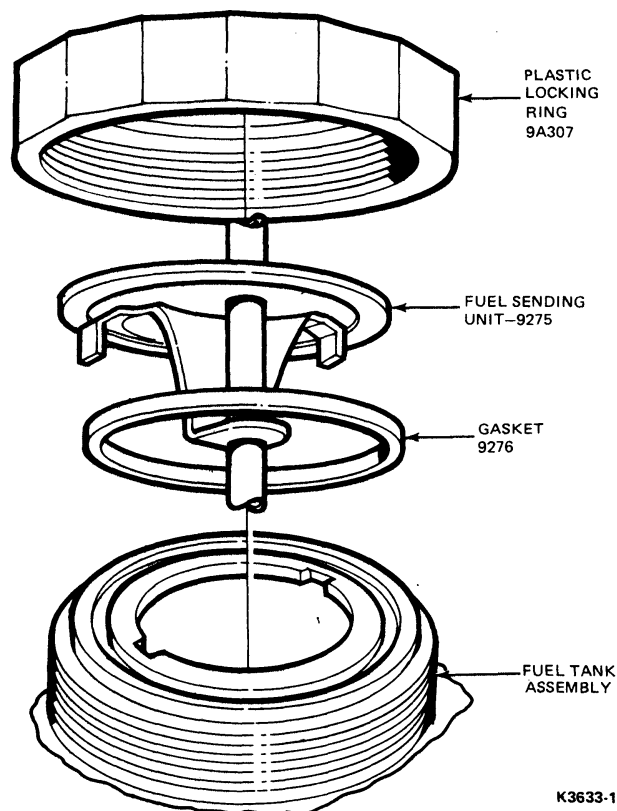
Fuel Tank Sender Installation (Plastic Locking Ring Type)
